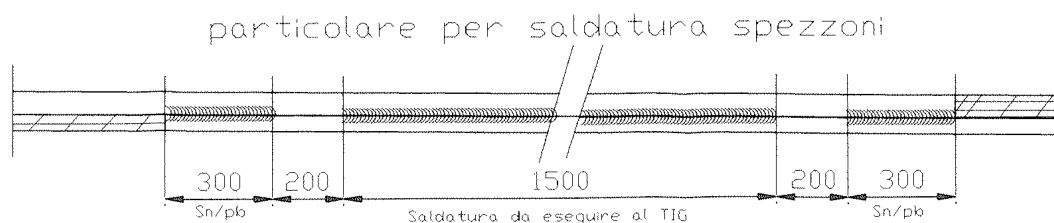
Internal splices (extracted from the original Ansaldo drawing): 1500 mm weld of aluminum edges + 200 mm gap + 300 mm solder of aluminum faces on both sides of the weld. The welding was done with the TIG (Tungsten Inert Gas) technique.
